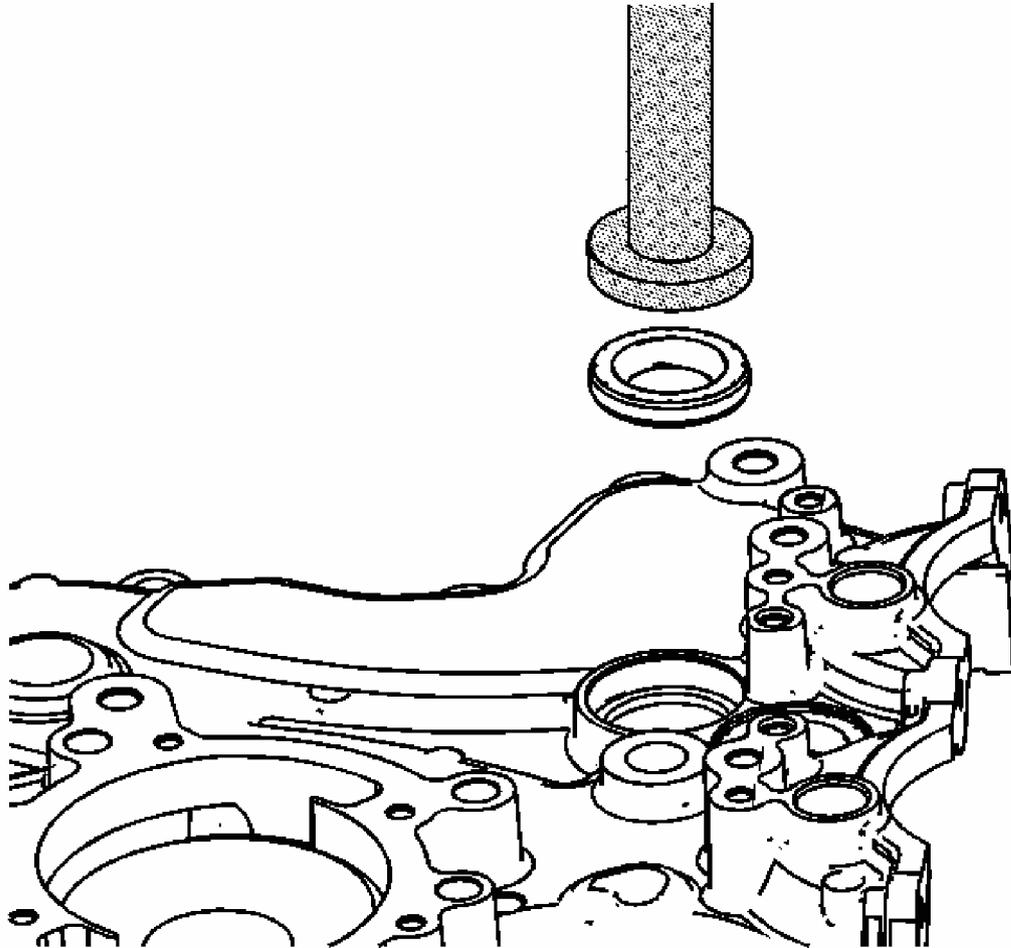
Installing Camshaft Position Actuator Valve Oil Seals
